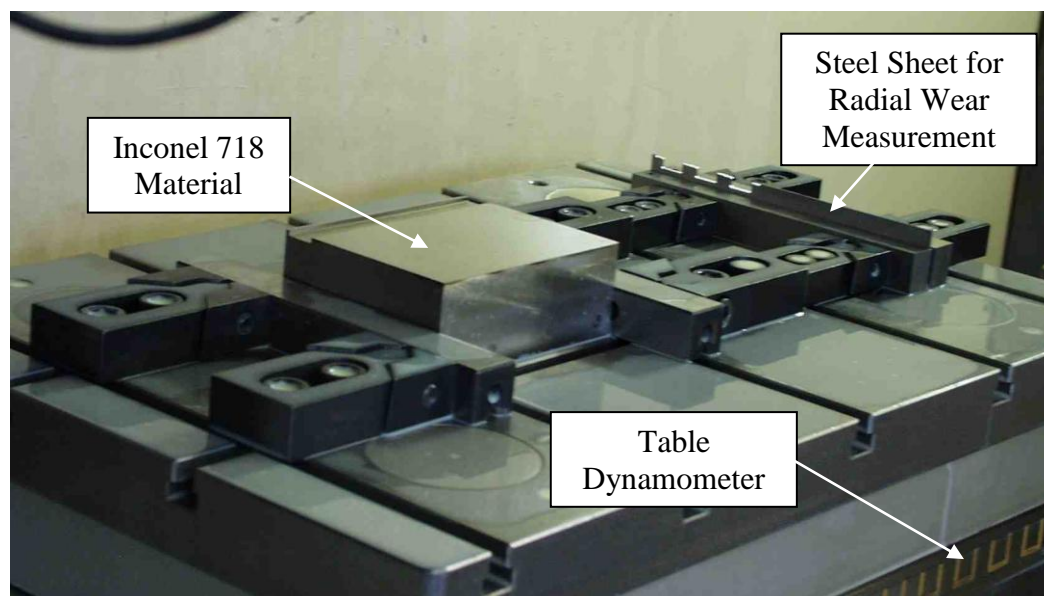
Experimental setup on Blohm machine tool detailing Inconel 718 material and steel sheet for tool wear measurement.
